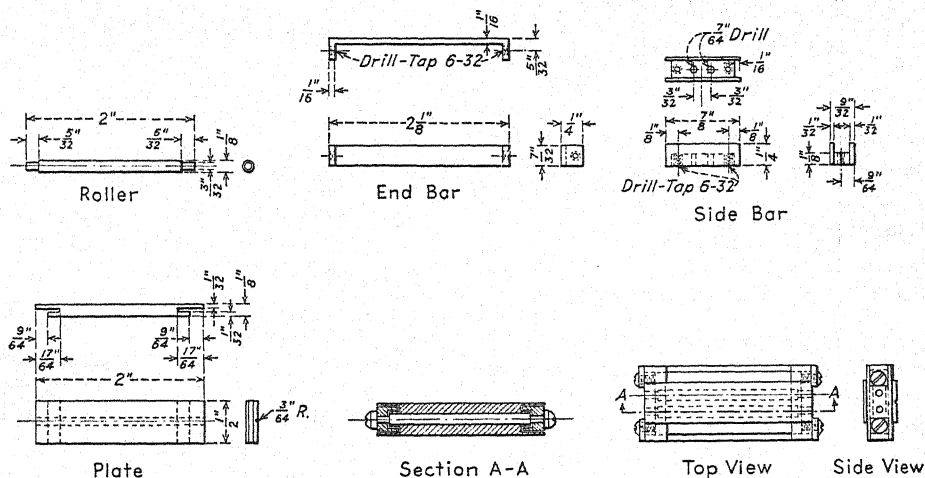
Roller-Bearing Plate for Supporting Specimen.
